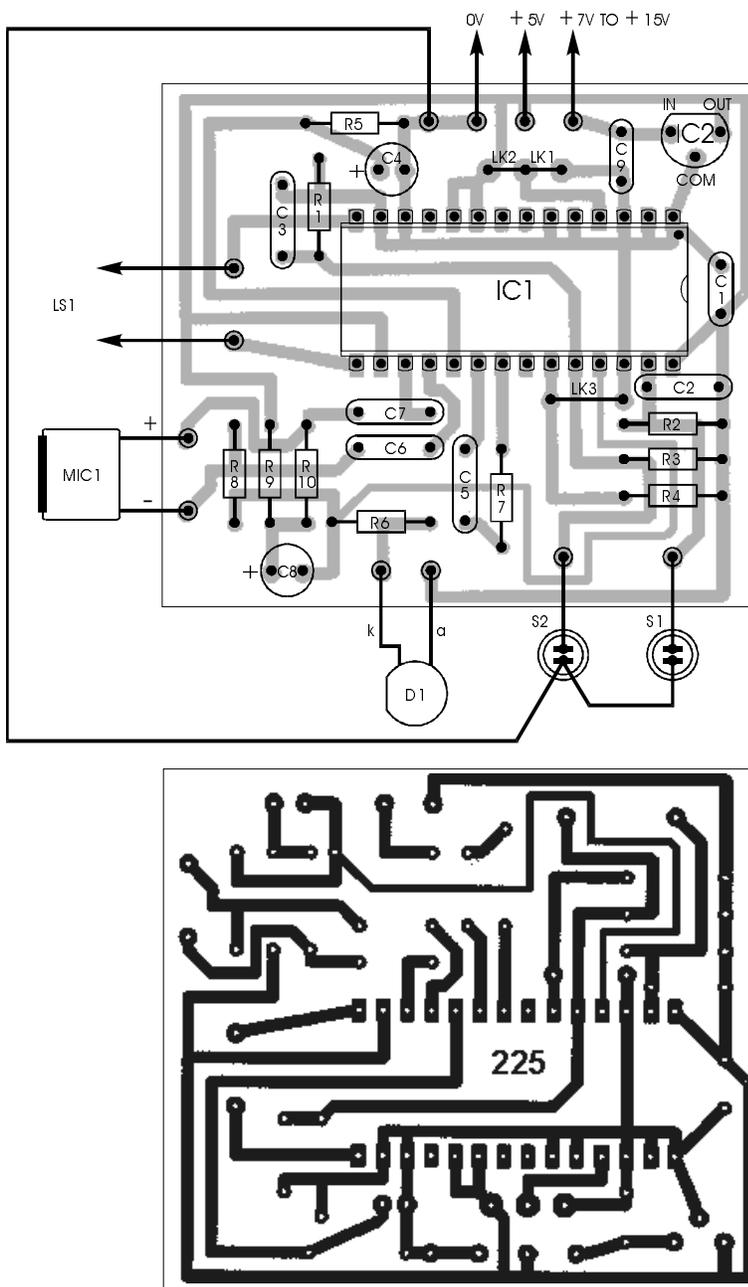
Voice Record/Playback Module printed circuit board component layout, wiring and (approximately) full-size copper foil master pattern.
